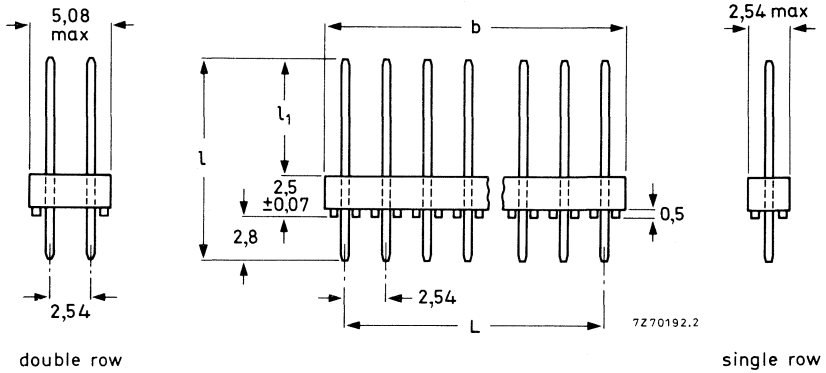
Male header with straight pins. See table for dimensions b and L .
